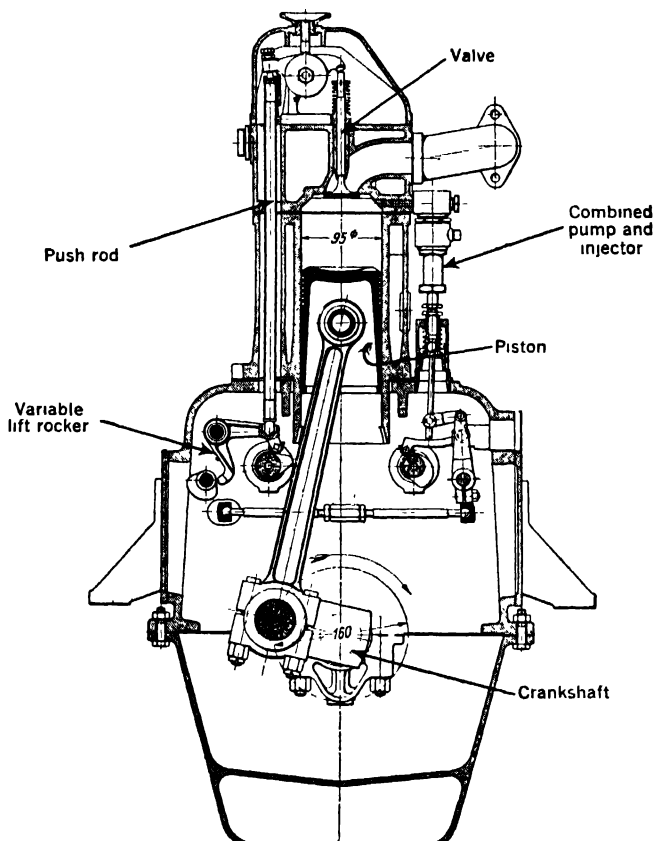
Cross Sectional View of the Dorner Constant Volume Diesel Engine.
